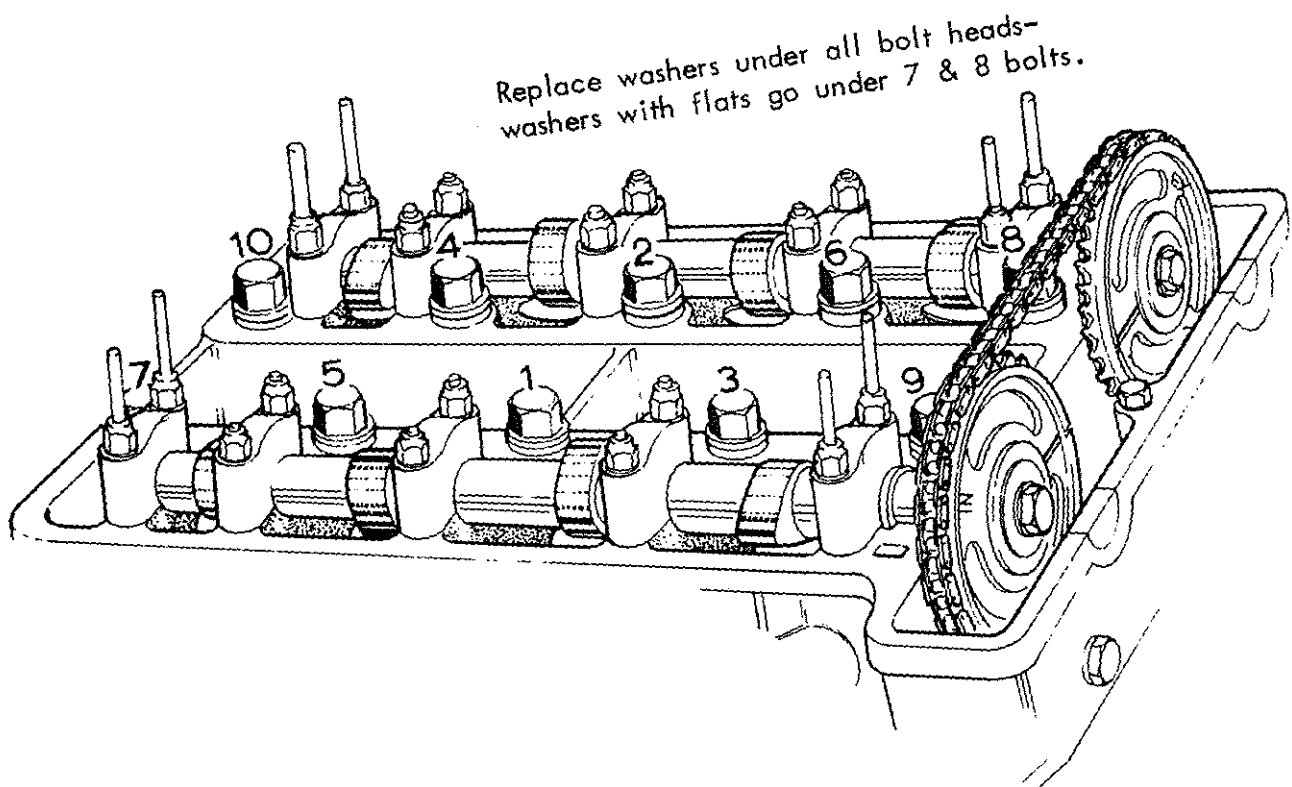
ORDER OF TIGHTENING HEAD BOLTS
